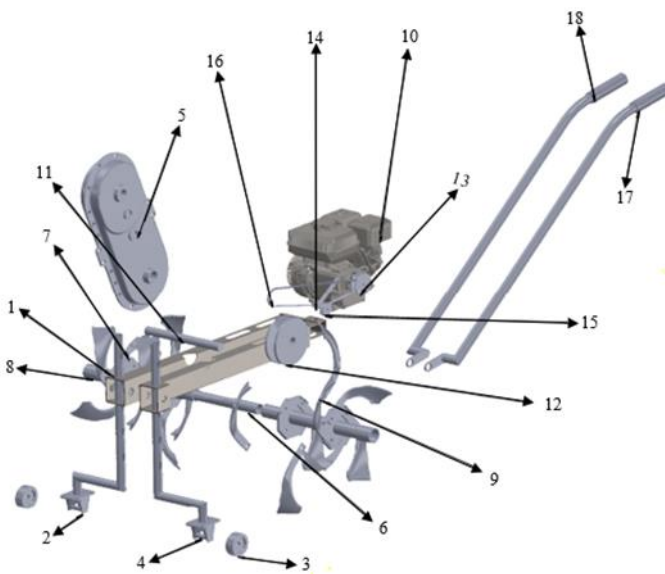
3D exploded view of the hand-pushed automatic weeder
